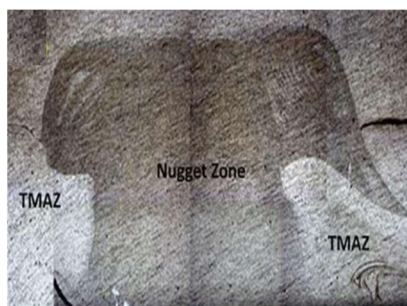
Microstructural cross-sectional view of friction stir spot welding (FSSW)
